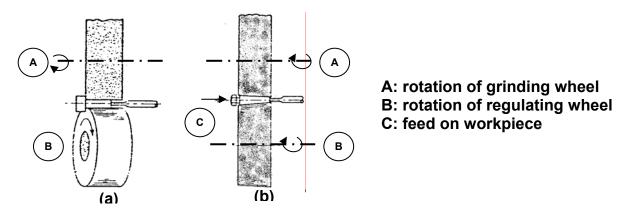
Centreless (a) infeed and (b) end feed grinding
